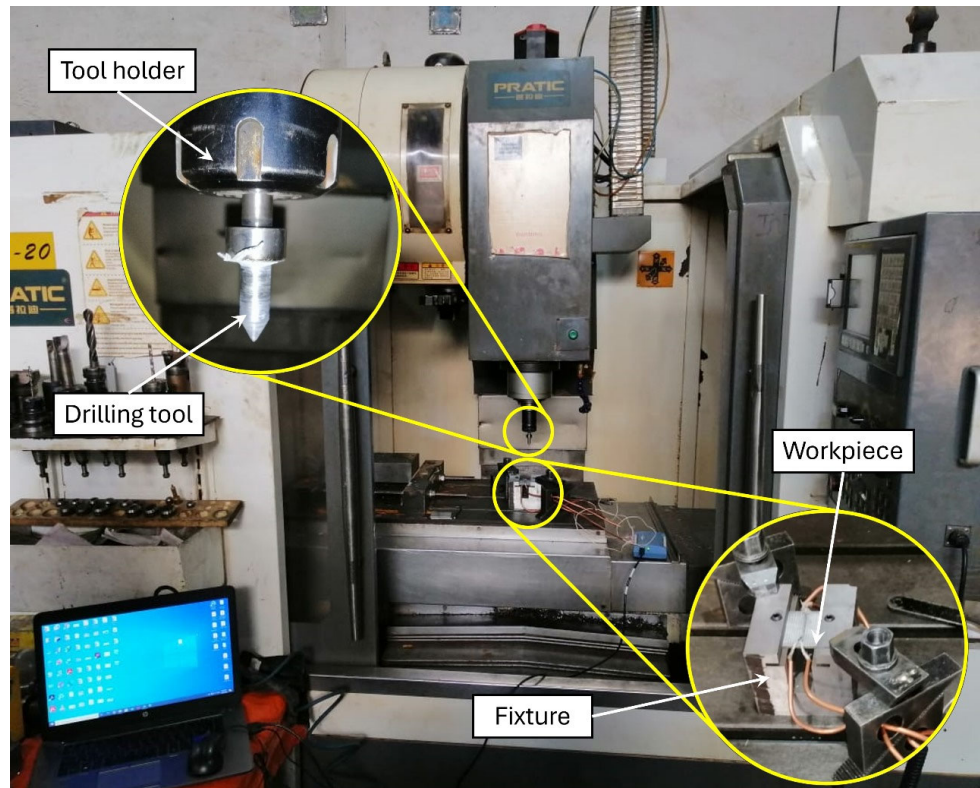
The CNC vertical milling machine used to accomplish the friction-drilling processes is represented with a magnified image of the fixture, tool, and workpiece.
